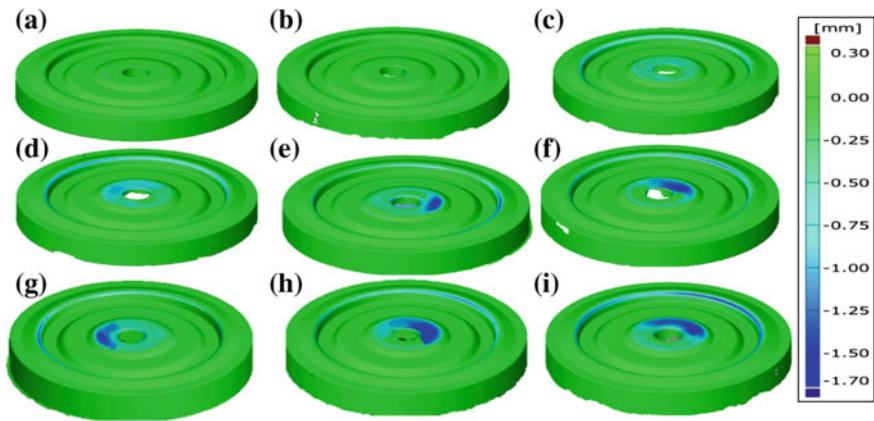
Tool scanning results after different numbers of manufactured forgings: a 550, b 1850, c 2500, d 4300, e 5000, f 6900, g 9500, h 11,000, i 12,500
